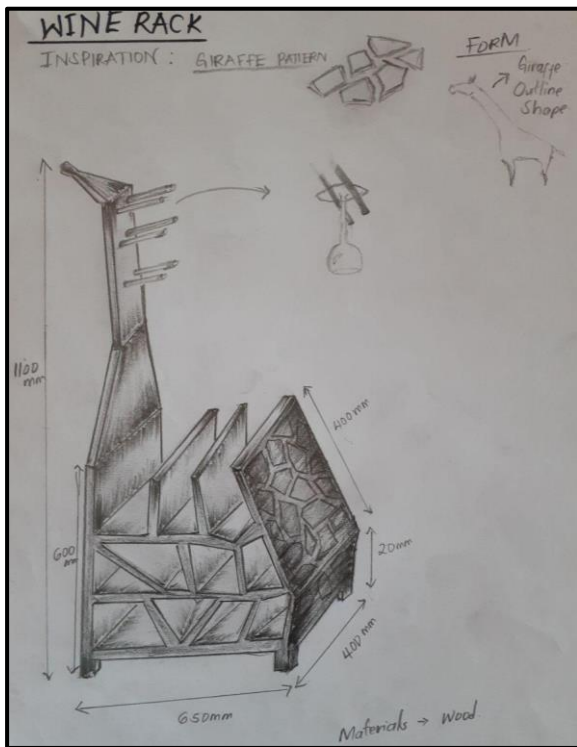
Furniture sketch (Source: Author's construct, 2020)
